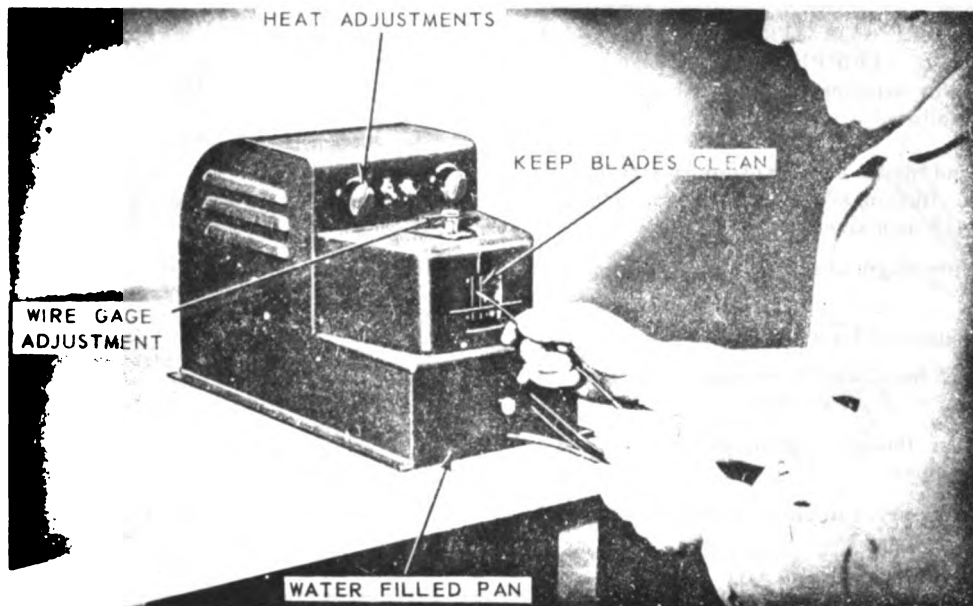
Stripping Wire in a Hot Blade Stripper
